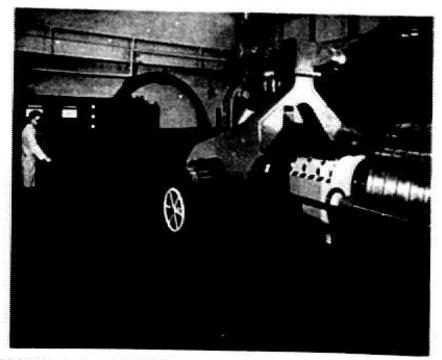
GENERAL VIEW OF WHEEL TESTING MACHINE
